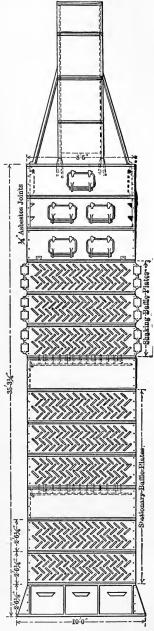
Elevation of stack drier, Edison plant. (Engineering News.)
